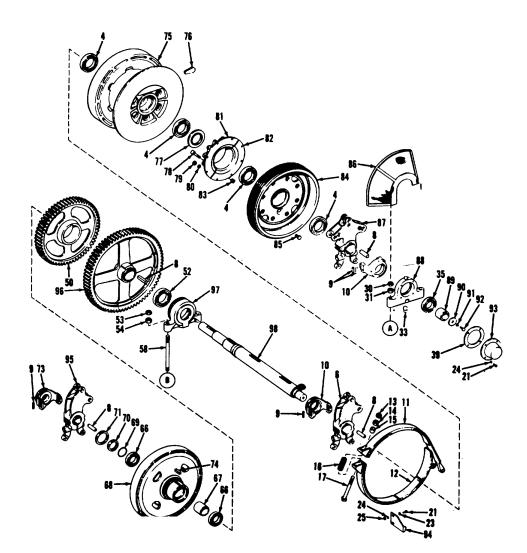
Rear and front drum shaft assembly exploded view (sheet 1 of 3).
